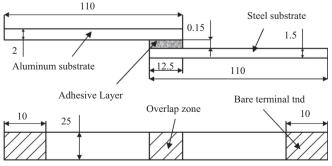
Geometry of the single lap joint specimen (dimension unit in mm).
